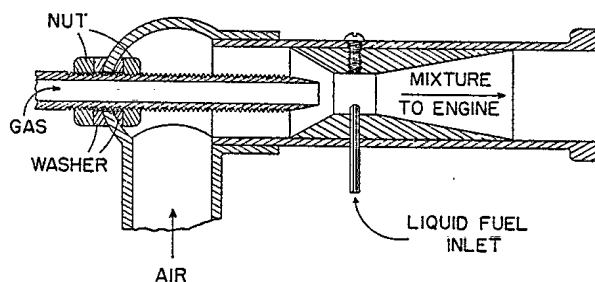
Carburetor arrangement used for running the C.F.R. engine on town gas.
